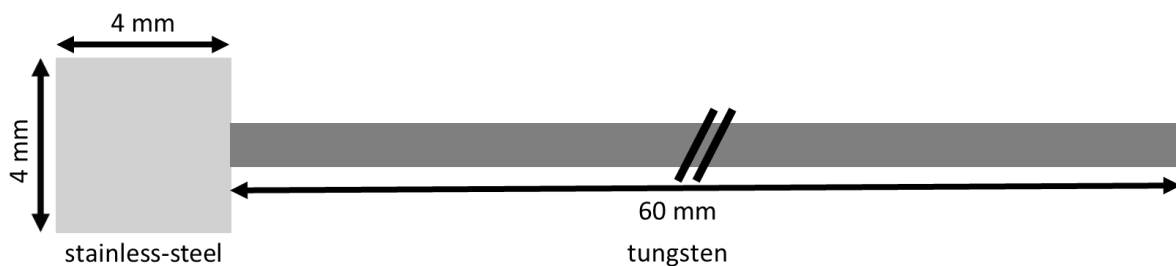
Sketch of a cantilever. The cantilever consists of a 4 mm x 4 mm stainless-steel plate and a 60 mm long, round tungsten beam.
